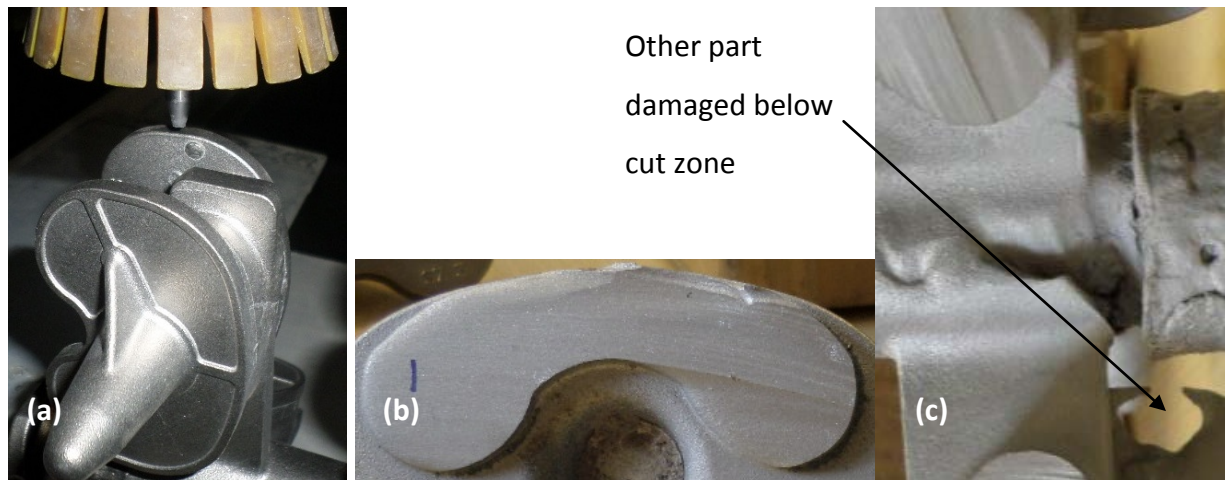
23: AWJC tray orientation 1 (through thickest gate section): (a) Setup (b) Surface finish (c) Part damage
